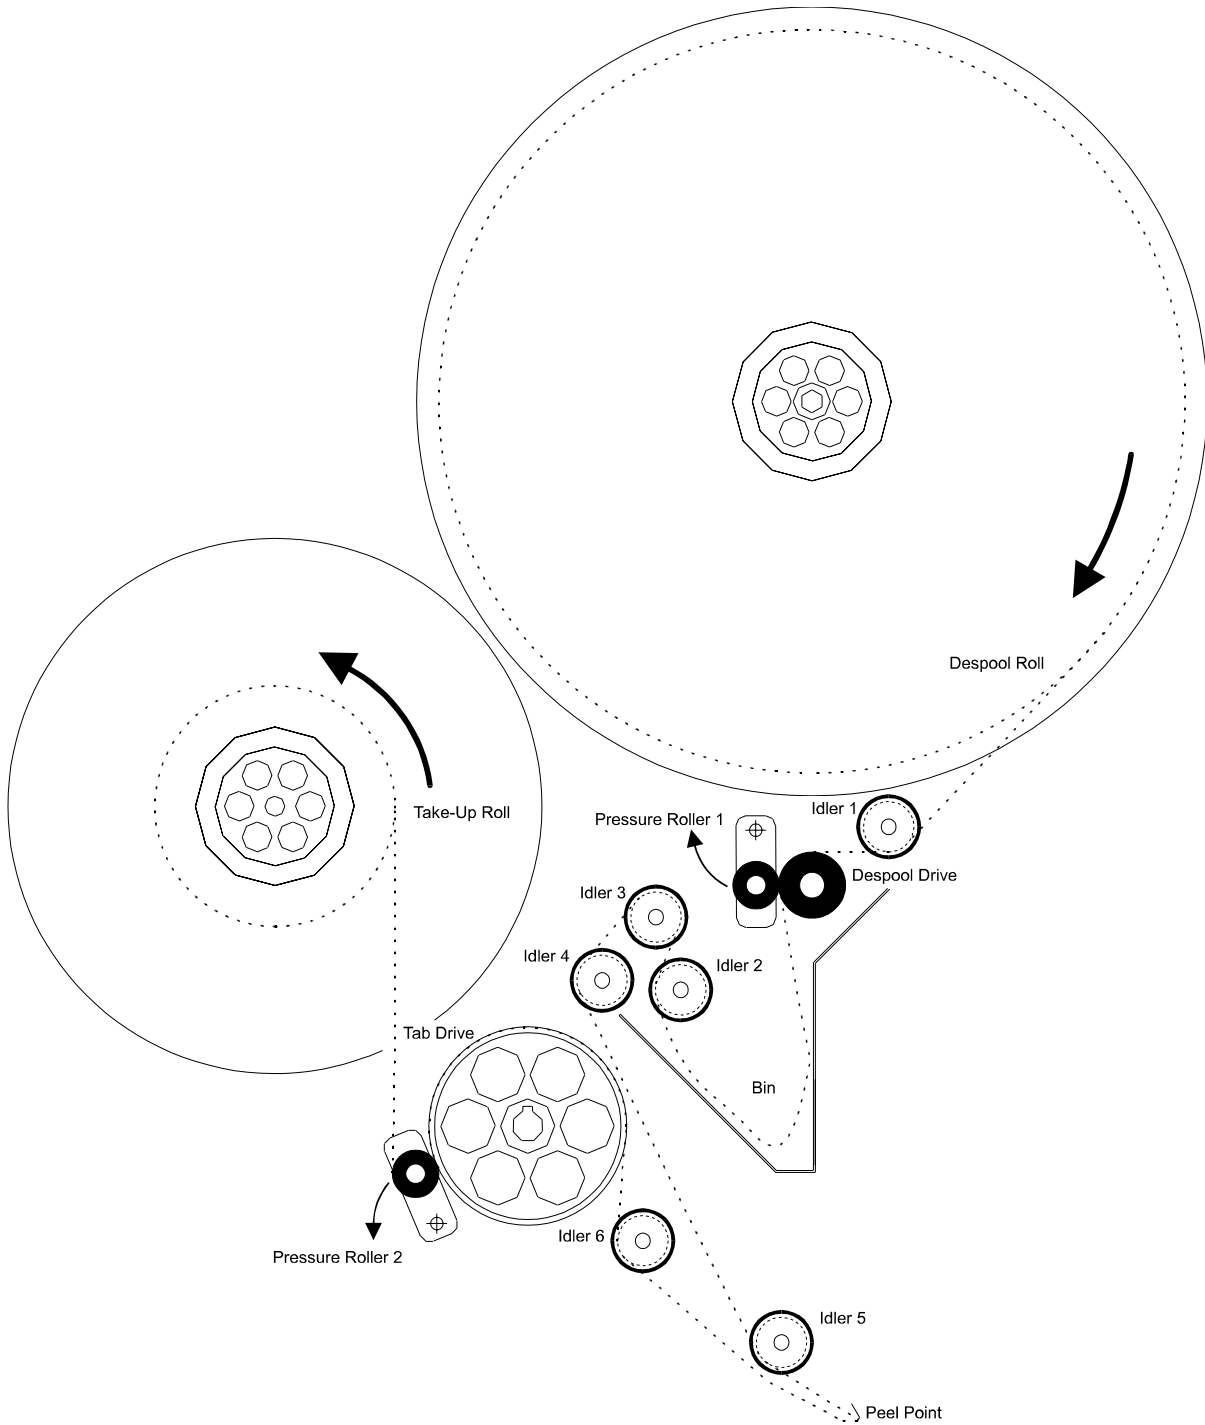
Side view of the tabber head illustrating the threading path of the tabs.
